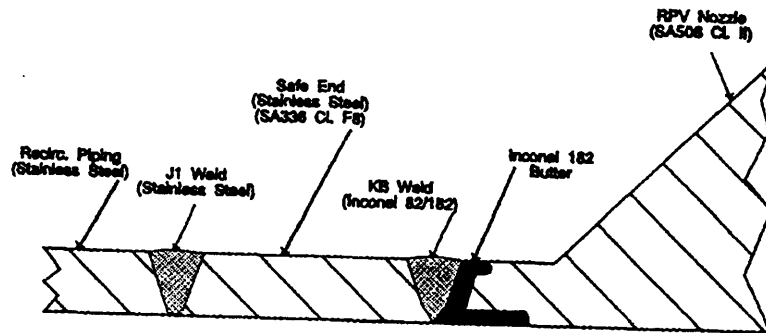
N1 Nozzle and Safe-end Weldments
